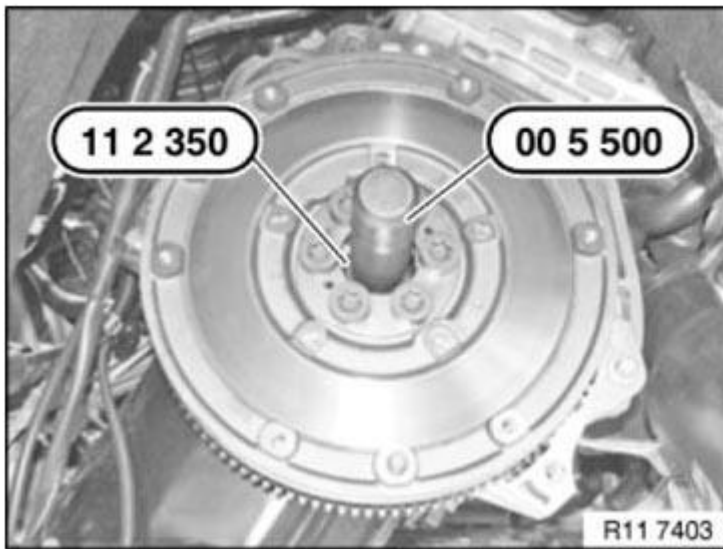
Installing New Thrust Bearing Using Special Tool 11 2 350 And 00 5 500
